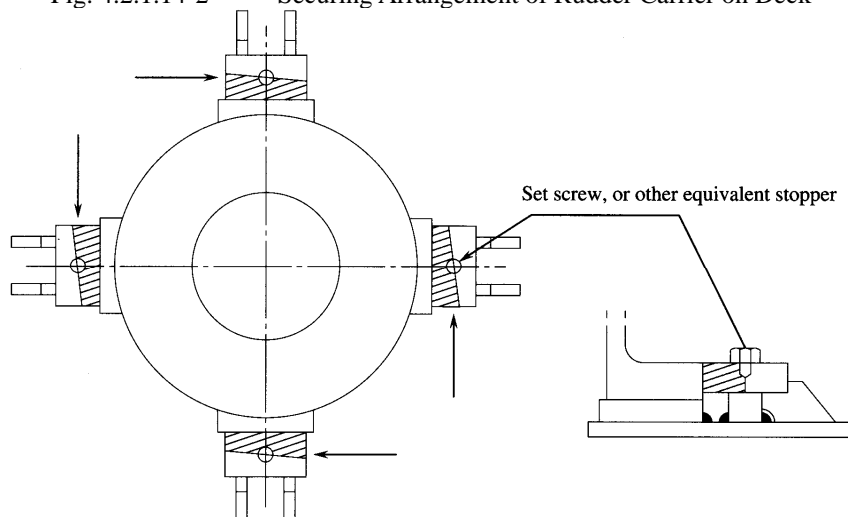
Securing Arrangement of Rudder Carrier on Deck
